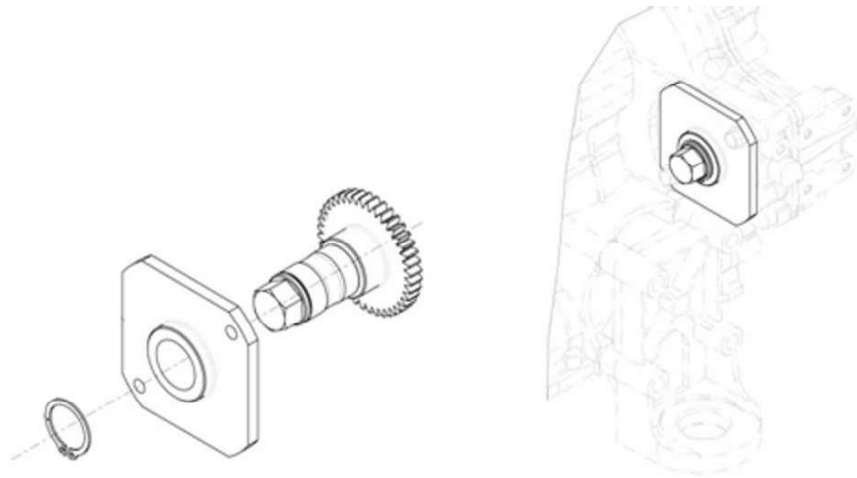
Turning gear - Mounting the power take-off NA4 special tool no. 30d
